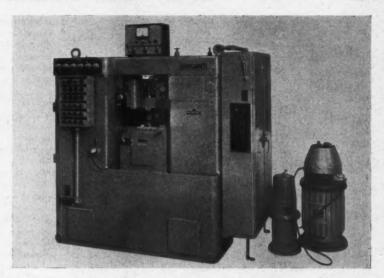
Minganti Rim Zero machine for grinding bores in inner races for miniature ball bearings
